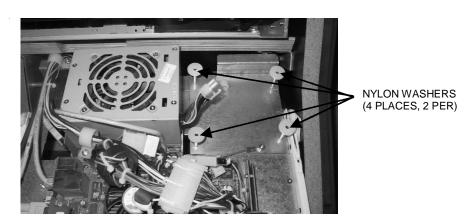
WASHERS SUPPORTING I/O MOUNTING BRACKET IN UPRIGHT GAME
